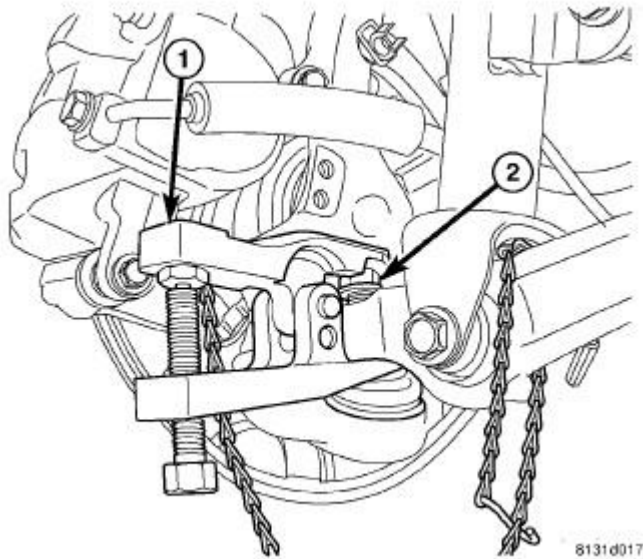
USING PULLER ON LOWER CONTROL ARM BALL JOINT
